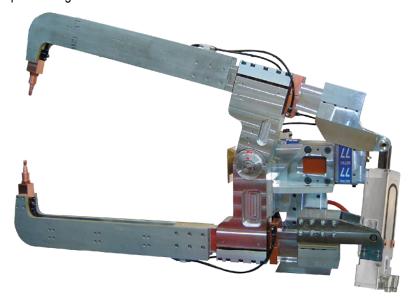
Example of ServoWeld actuator installed on "X" Style weld gun unit.
